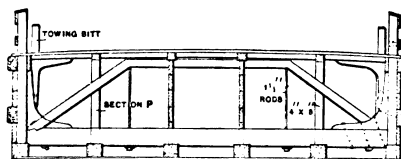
Cross Section, Showing Trussing and Knees.—
